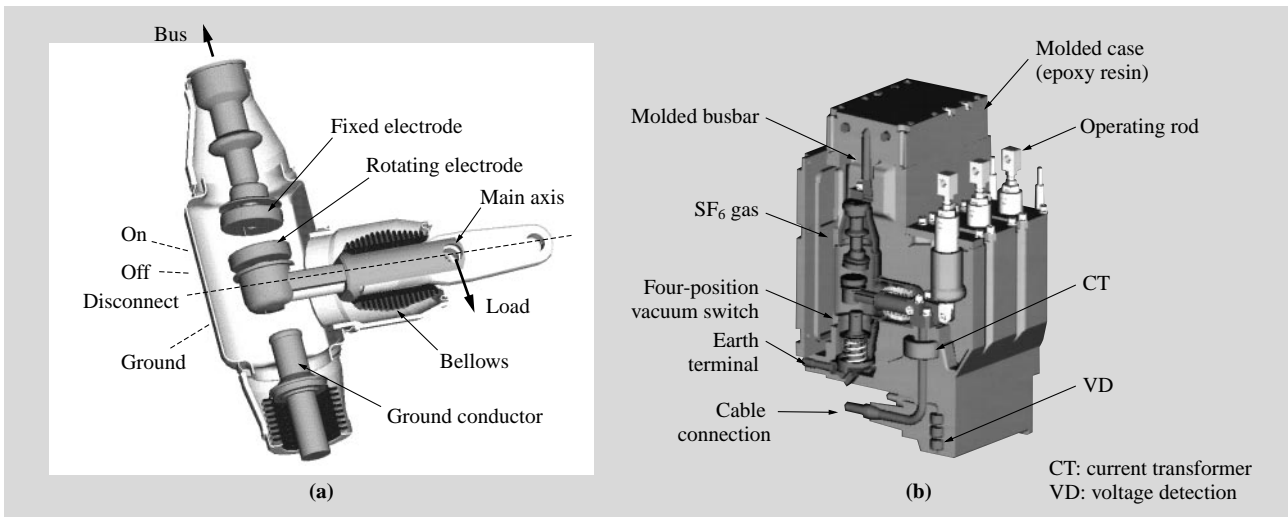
Internal Structure of Hybrid Switchgear Circuitry. Structure of four-position vacuum valve (a), and cut-away epoxy resin module showing circuitry (b).
